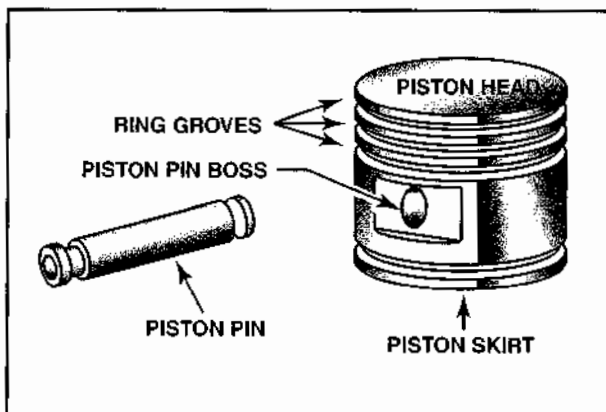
A typical piston has ring grooves cut into its outside surface to support piston rings. Cooling fins are sometimes cast into the piston interior to dissipate heat. The piston pin boss provides support for the piston pin.
